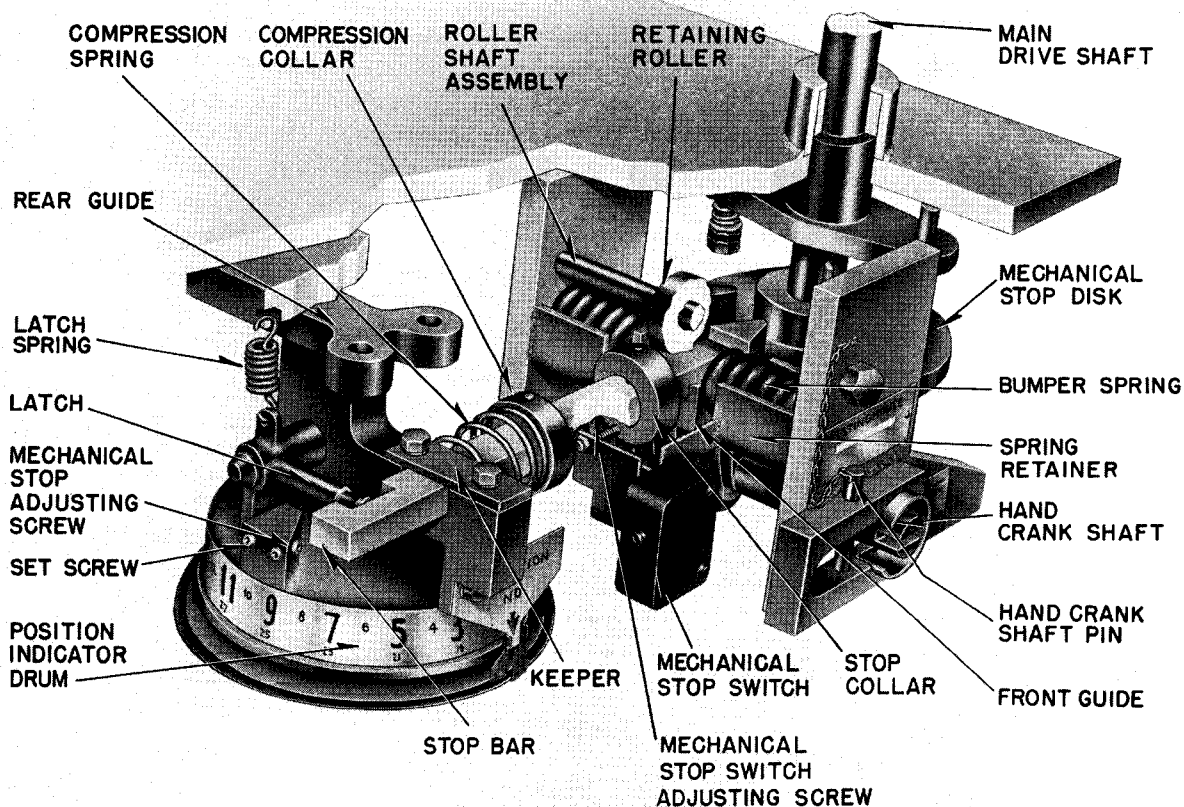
Cutaway View of "URS" Tap Changer Mechanical Stop
